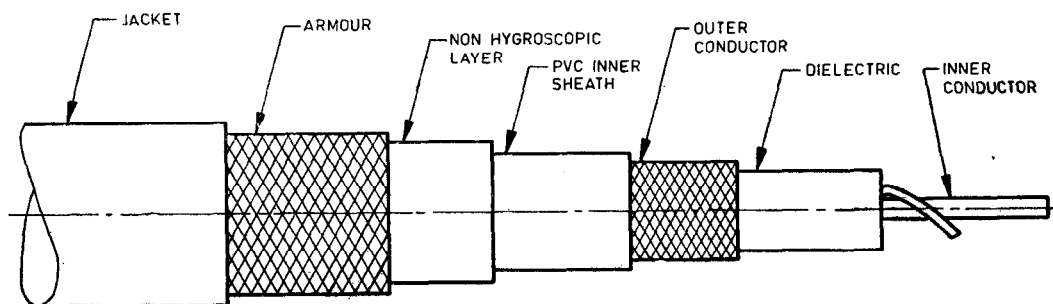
OUTLINE DRAWING (UNBALANCED CABLE)
